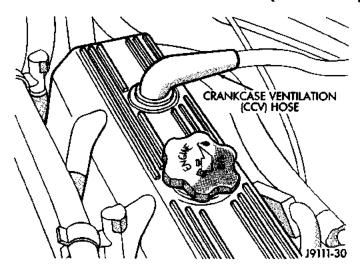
Crankcase Ventilation (CCV) Hose (2.5L Engine)
